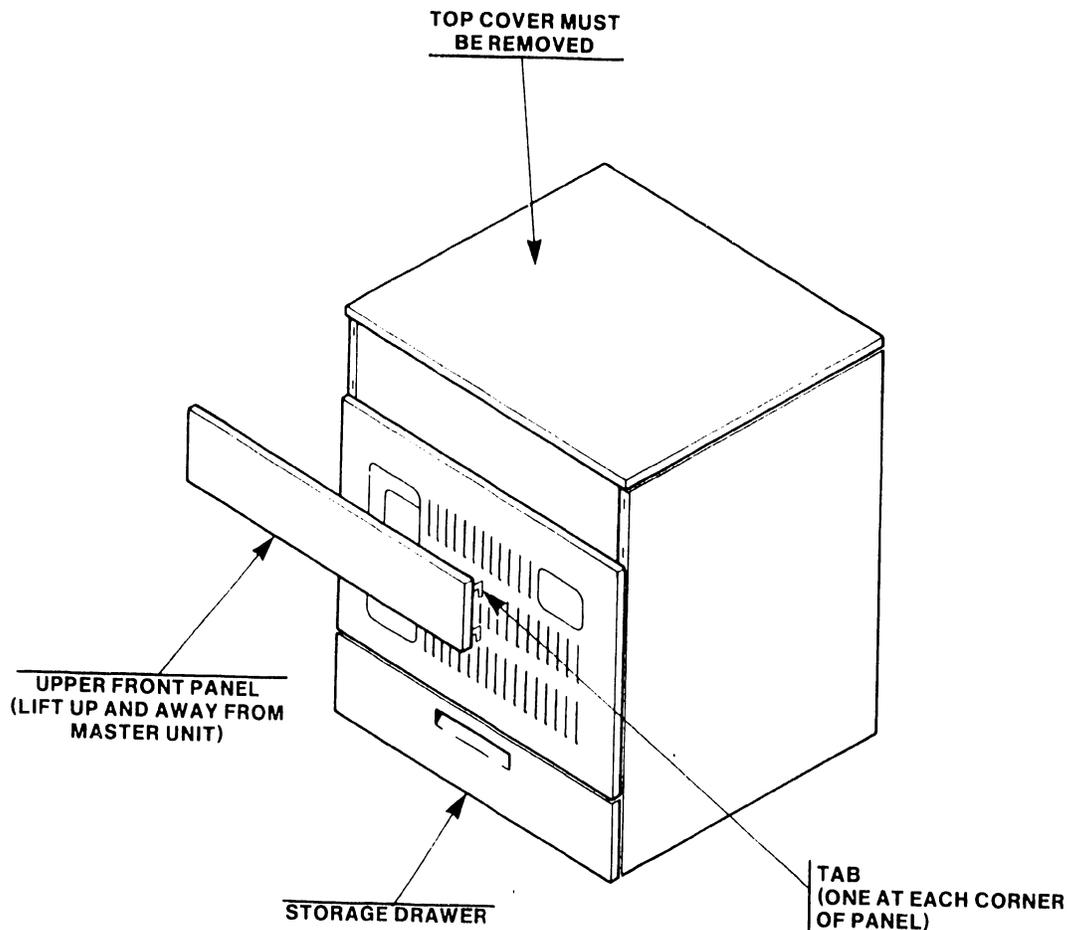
REMOVING MASTER UNIT UPPER FRONT PANEL
